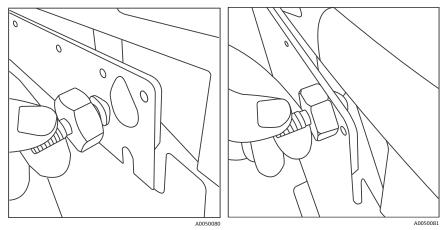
Cutouts on rear of enclosure engage the mounting bolts
